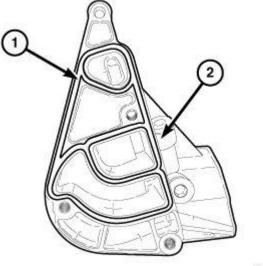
Oil Filter Housing & Bolts Courtesy of CHRYSLER GROUP, LLC
